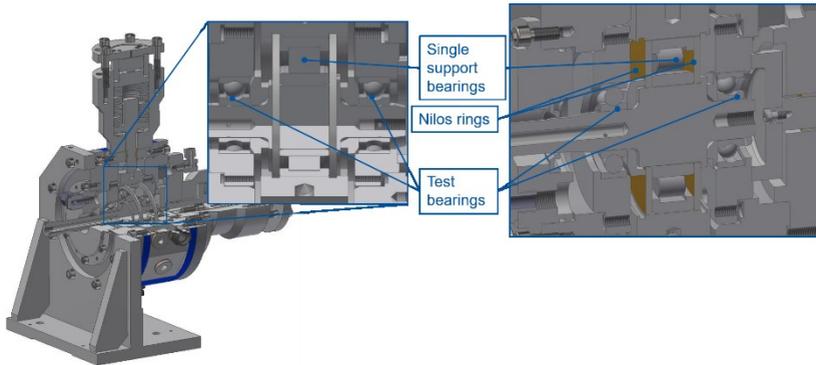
Radial bearing test rig with two test ball bearings of 6305 for evaluation of bio-based greases in rolling bearing applications
